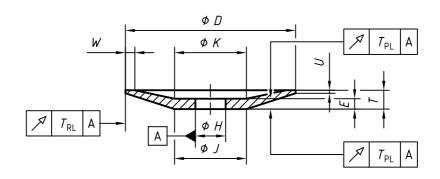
Dish wheel, e.g. as specified in ISO 603-6
